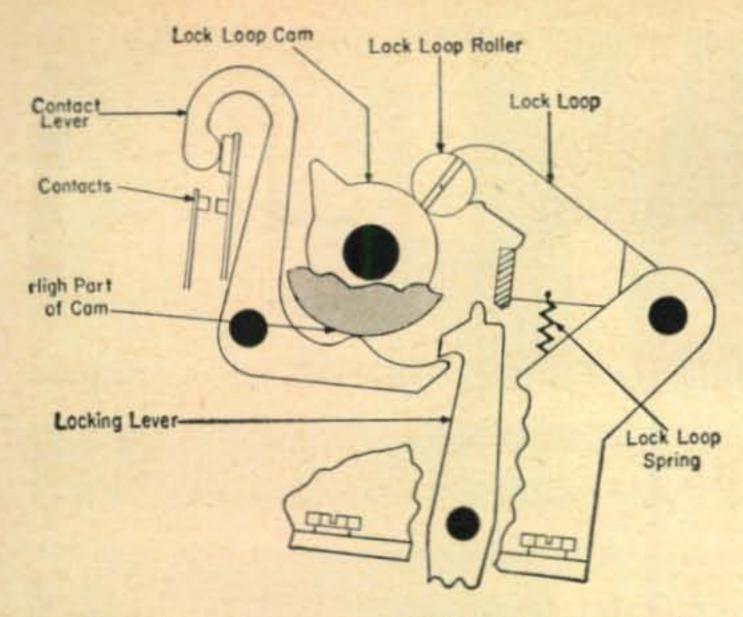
Keyboard contact and locking lever mechanism of Model 15 Teletype machine.
